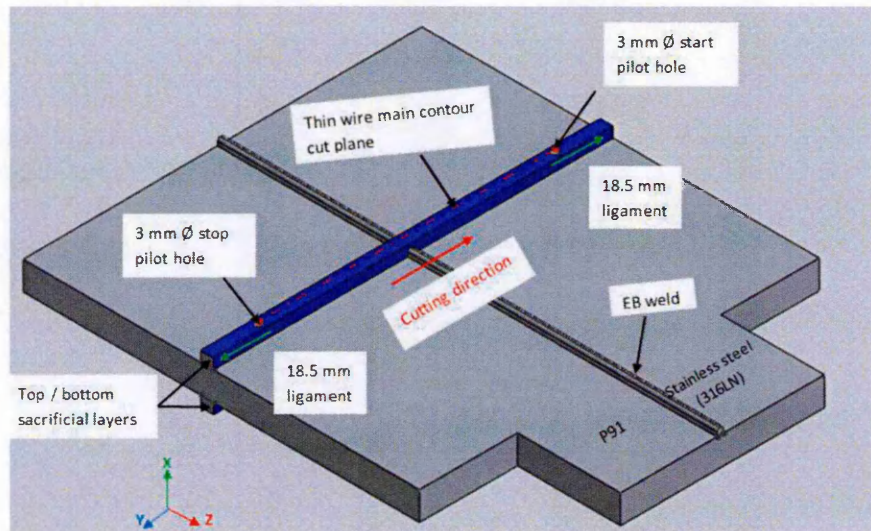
Schematic drawing of the P91:316SS electron beam welded plate (250 mm x 155 mm x 11 mm) showing the embedded cutting configuration using start and end pilot holes and cutting direction, with protective strips attached at the plane to be cut (note length reduced to 194 mm).
